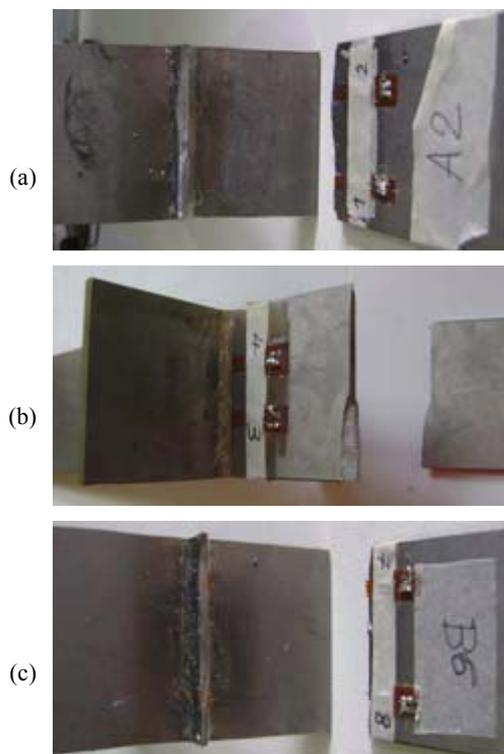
Three different fatigue fracture locations for the cruciform no-load carrying Ti6Al4V hybrid welded joints: (a) at the weld toe; (b) within the nominal zone; (c) within the HAZ.
